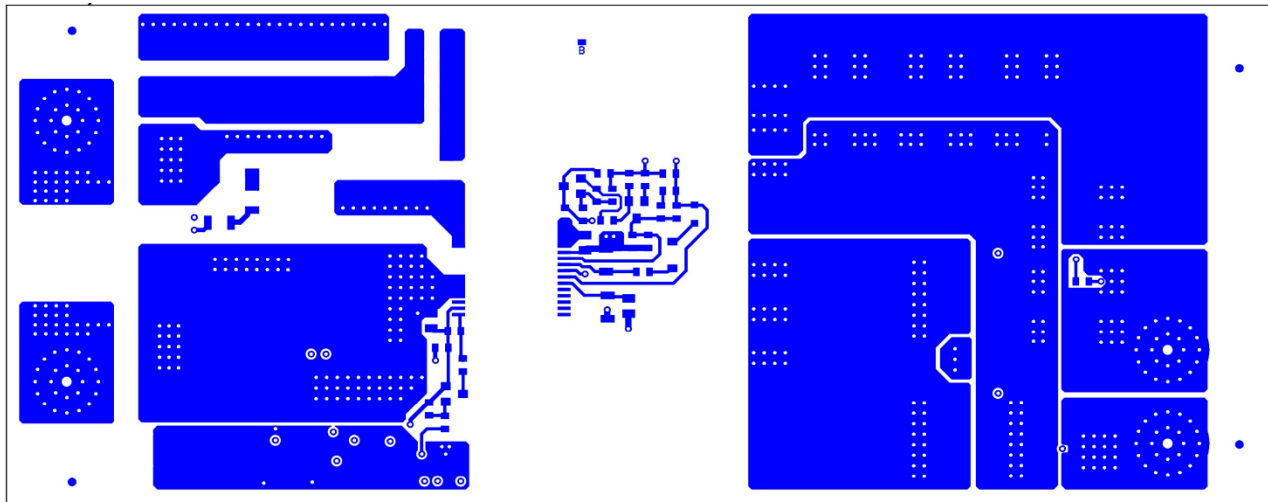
DER-953Q Bottom Layer PCB Layout.
